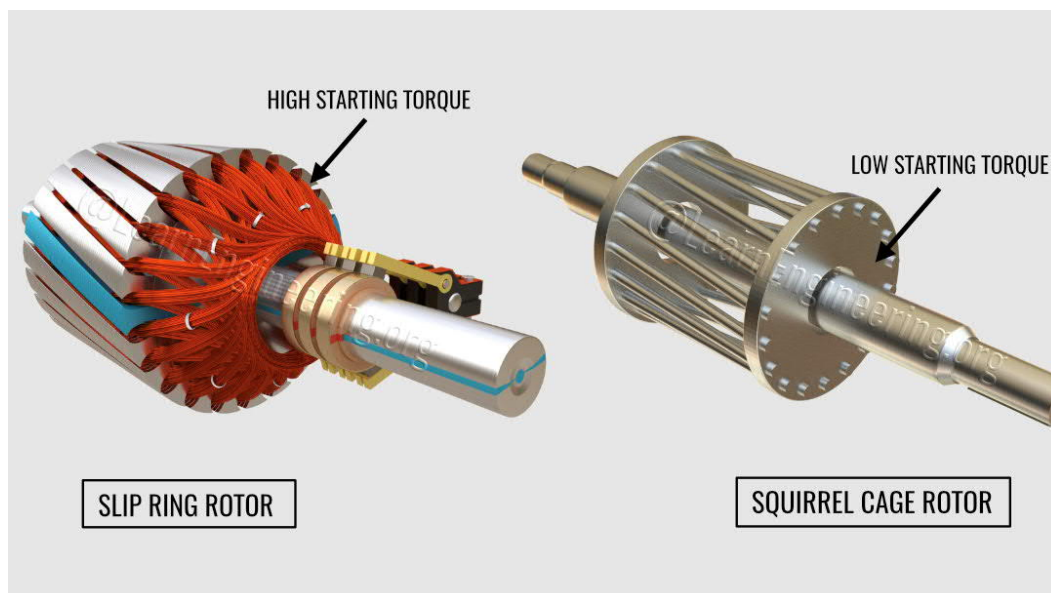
A Slip ring rotor and a squirrel cage rotor (Baradkar, 2018)
